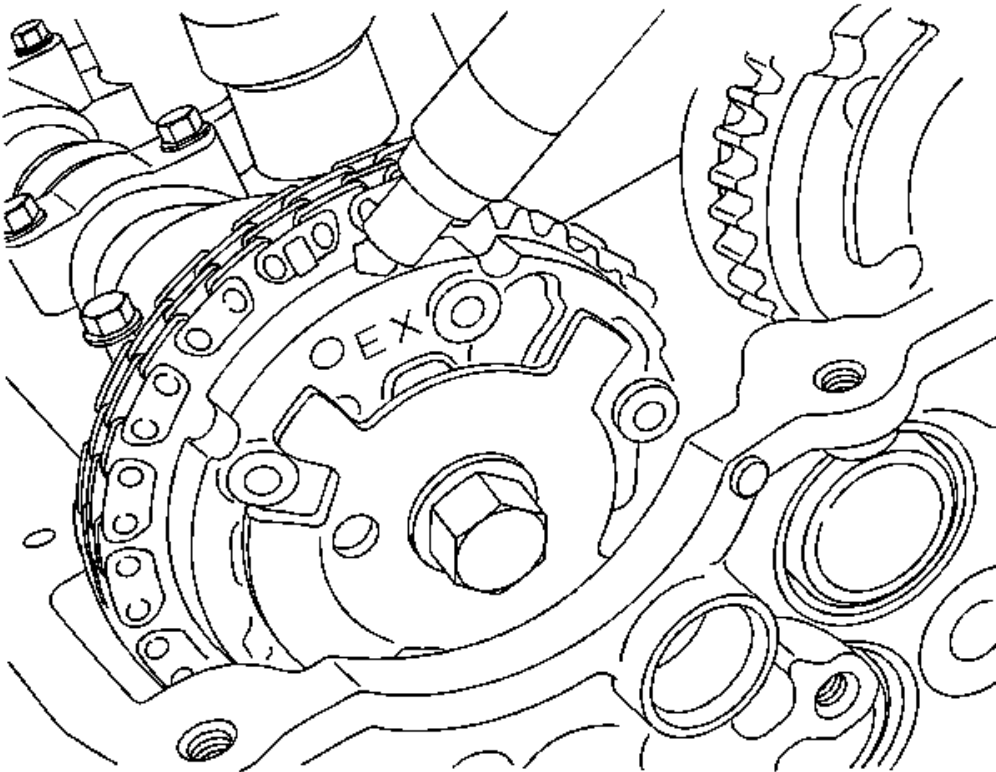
Marking Position Of Chain To Camshaft Position Actuator - Exhaust
